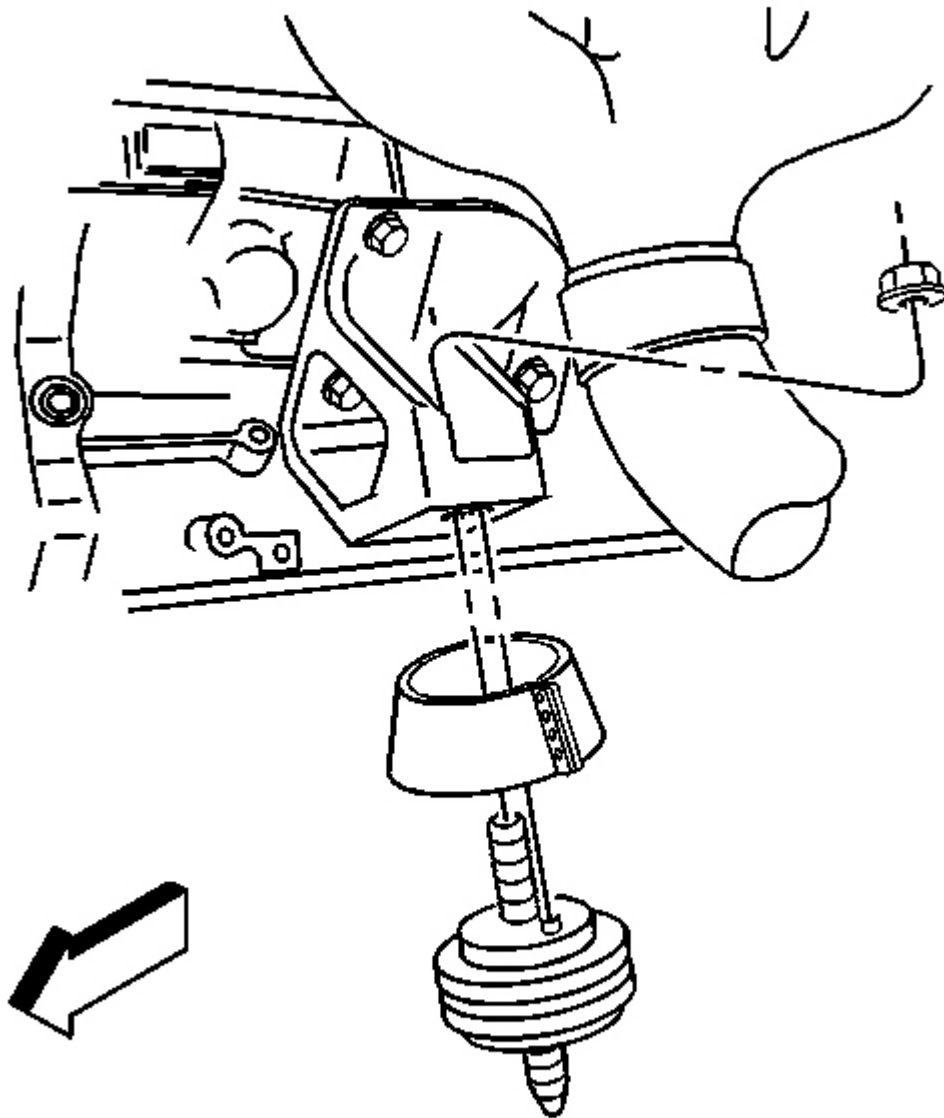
Engine Mount-To-Engine Mount Bracket & Nuts
